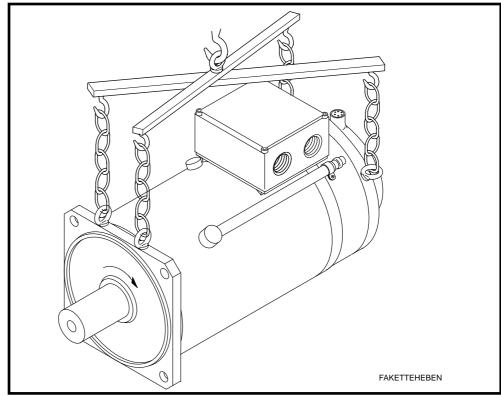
Lifting and transporting an ADF main spindle motor using appropriate chain equipment
